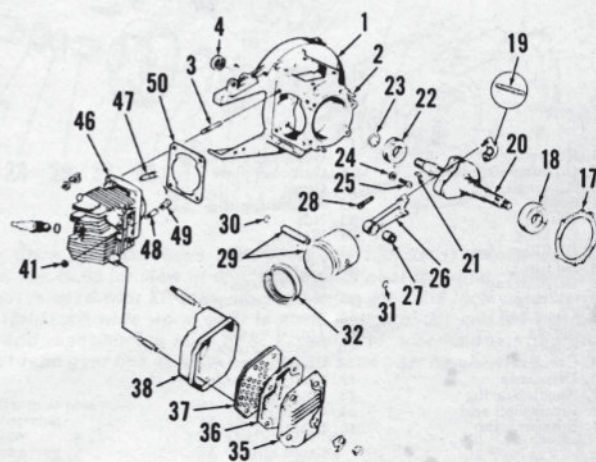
Exploded view of powerhead used on Super 2000 saw. Other 2000, 2100 and 3100 series models are similar. Some models use two conventional piston rings instead of head land type ring shown. Be sure piston and rings are of same type.
